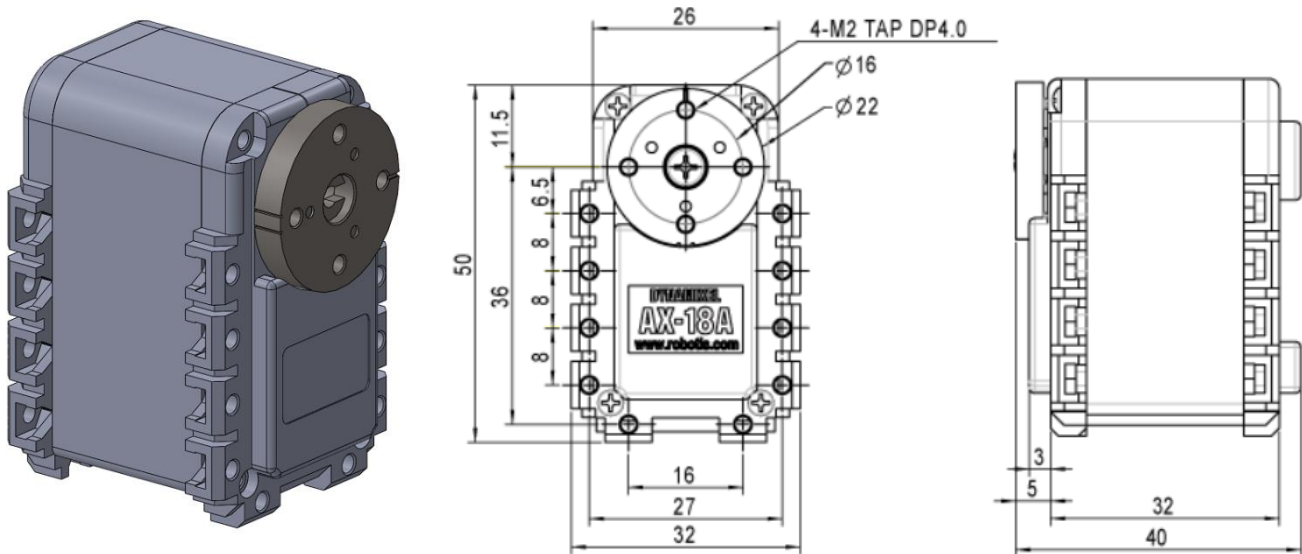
Technical Drawing and Trimetric Views of the Servo Motor
